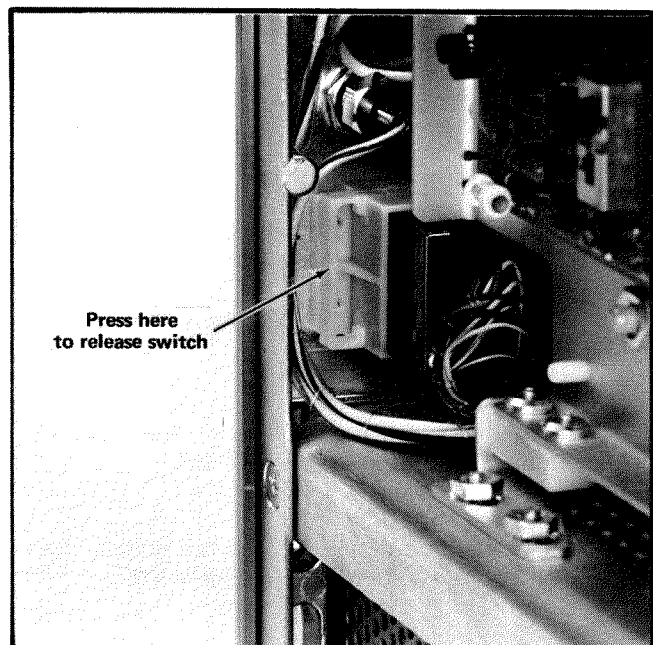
Detailed view of trigger source switch holder (B TRIGGER SOURCE switch shown).
